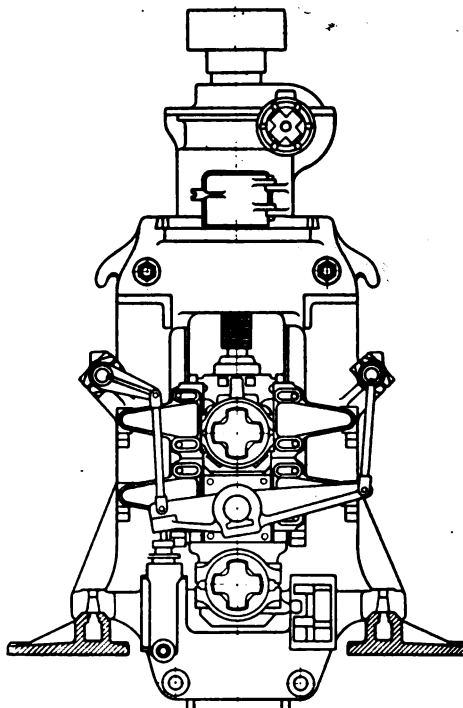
End view of Lauth mill, showing balancing of top roll and hydraulic operation of middle roll.
